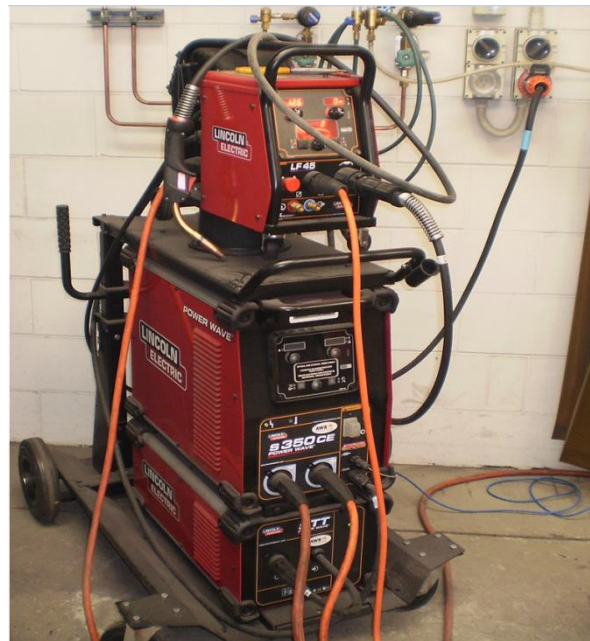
Lincoln Electric power wave S350 welding machine
